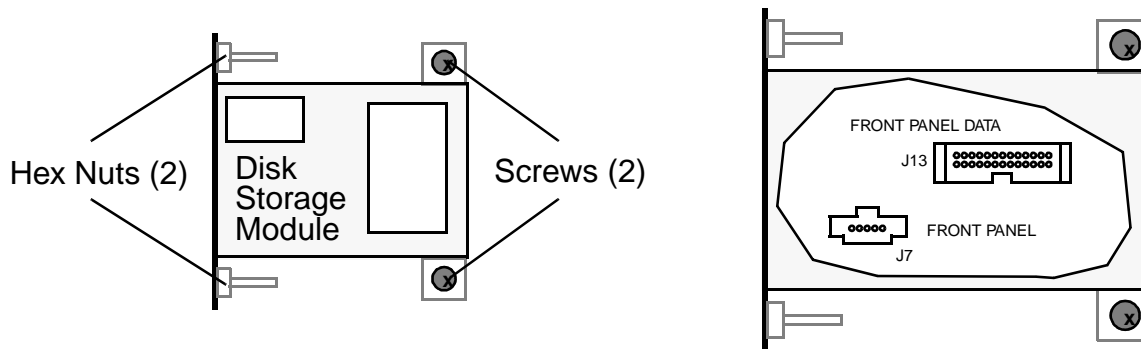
Disk Storage Module (left), Cutaway View of J7 and J13 Connectors (right)
